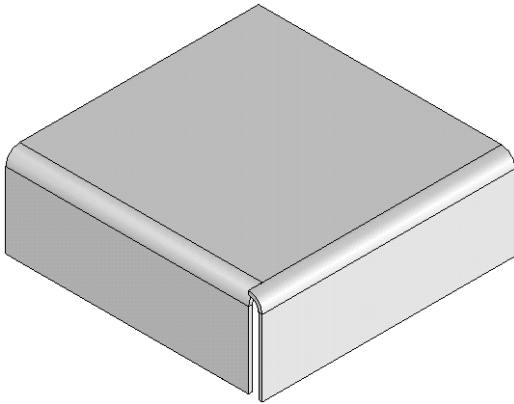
Edge flange created with the Trim side bends check box cleared
